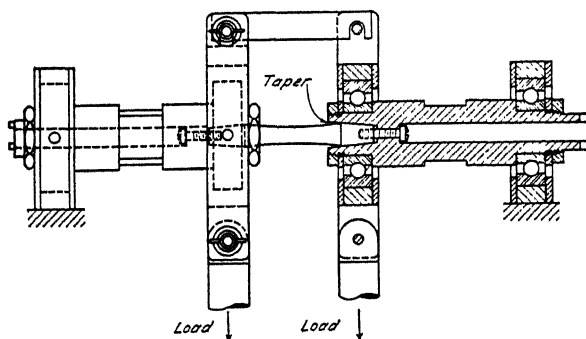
Attachment to rotating-beam testing machine for fatigue testing.
